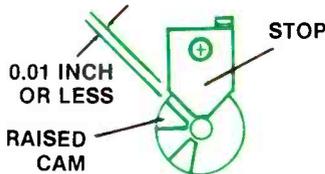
With the read/write head in the track 1 position, adjust the stop for a clearance of 0.01 inch or less between the stop and the cam located on the right side of the head assembly.
